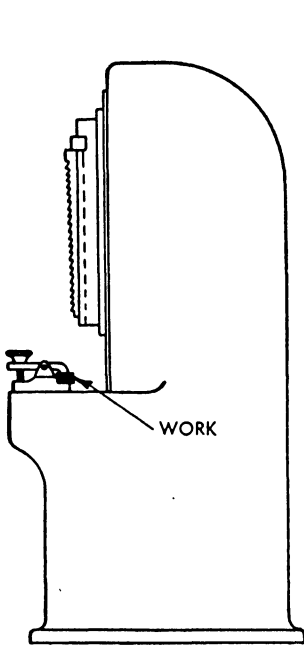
Outlines of a vertical surface-broaching machine in which the tool holder is backed up by the body housing of the machine when long heavy cuts are taken.
